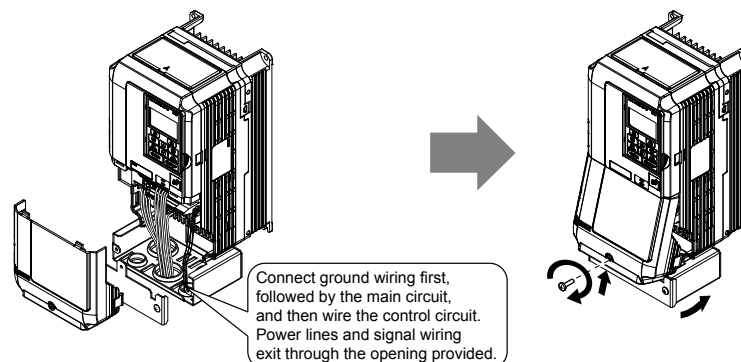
Reattaching the Terminal Cover on an IP20/NEMA Type 1 Enclosure Drive
